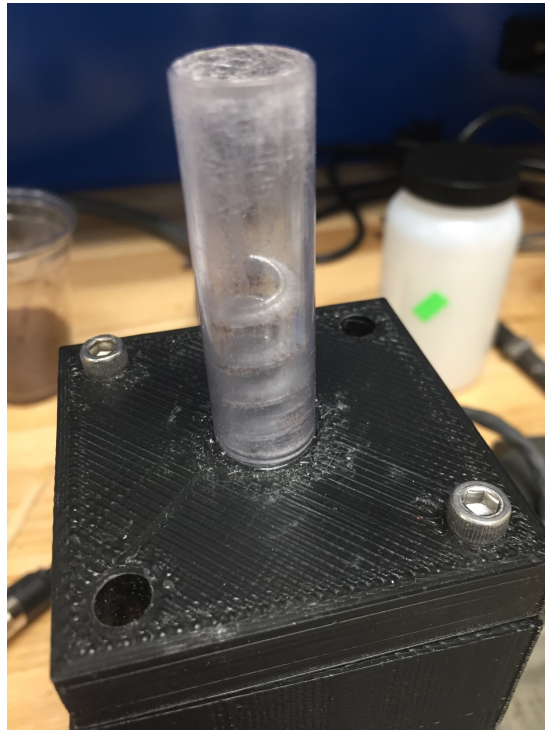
3D printed aluminum for spiral mixing blades.
